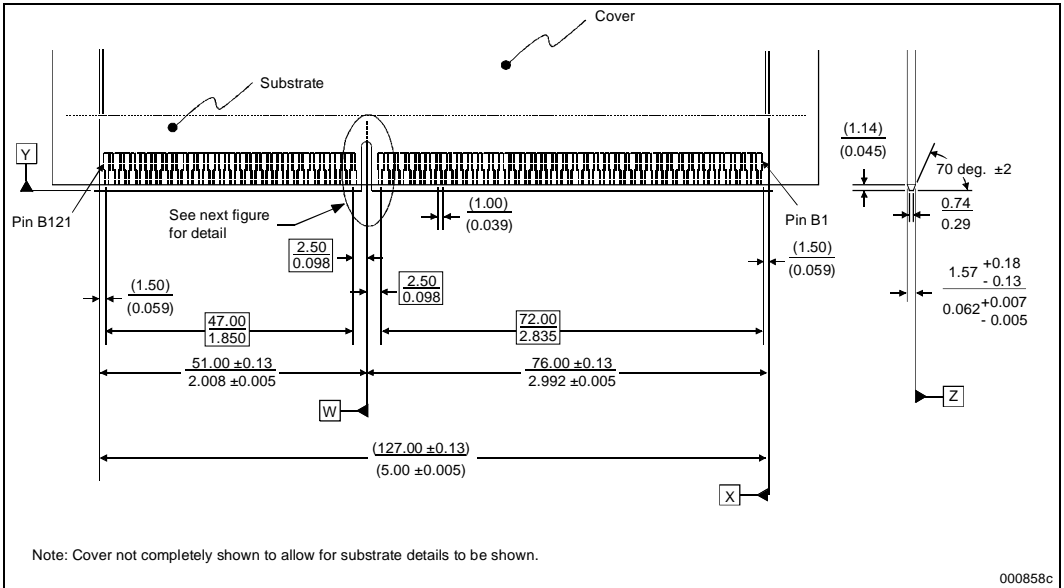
Substrate – Edge Finger Dimensions, Cover Side
